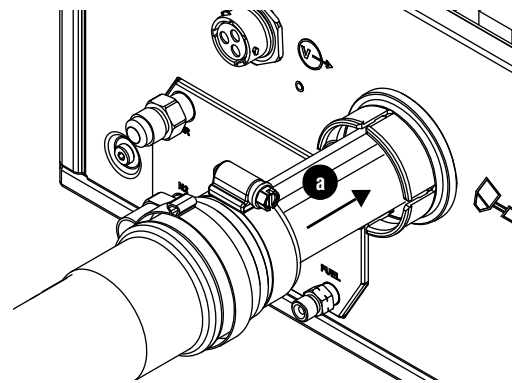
Pilot arc, coolant hose set, and shield water assembly
